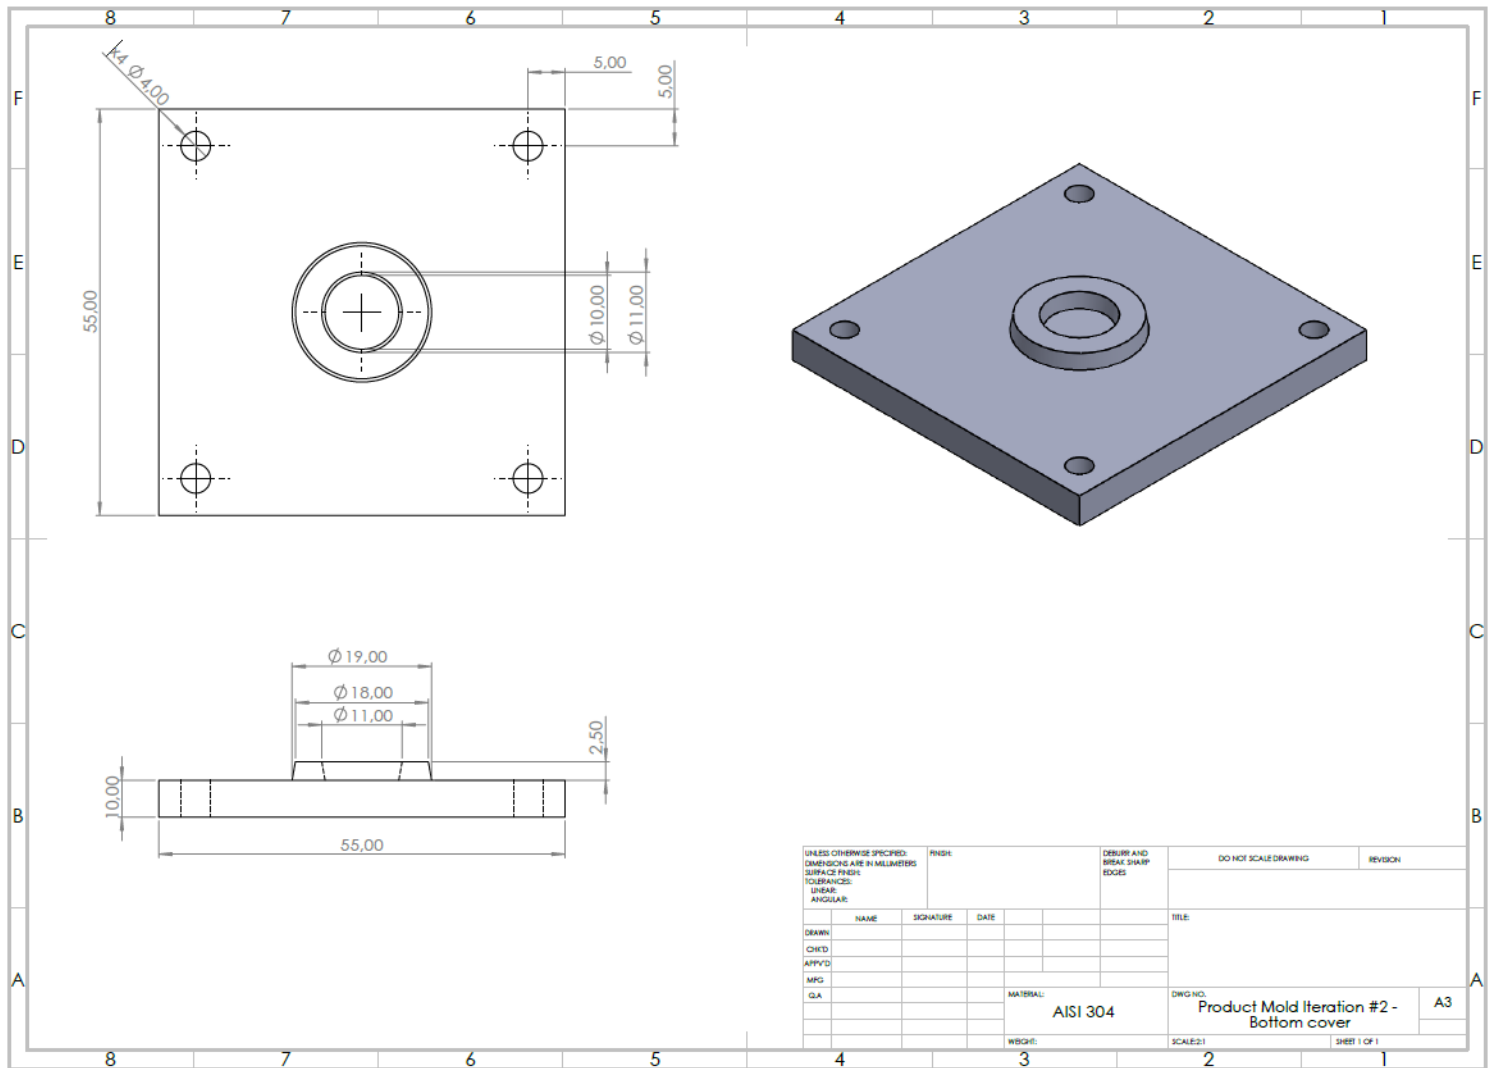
Rotation Knob Mold Iteration #2 – Bottom Cover
